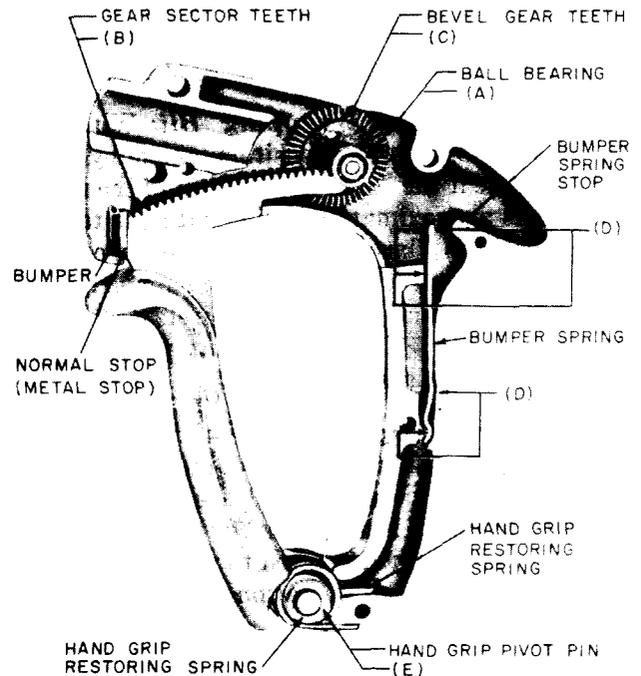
KS-16363, L1, Wire-Wrapping Tool—Interior View Showing Gearing and Associated Parts
